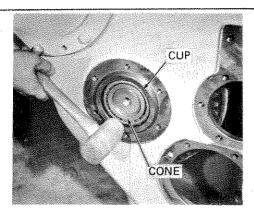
Installation of Drum and Drum Shaft (Sheet 2 of 3)
